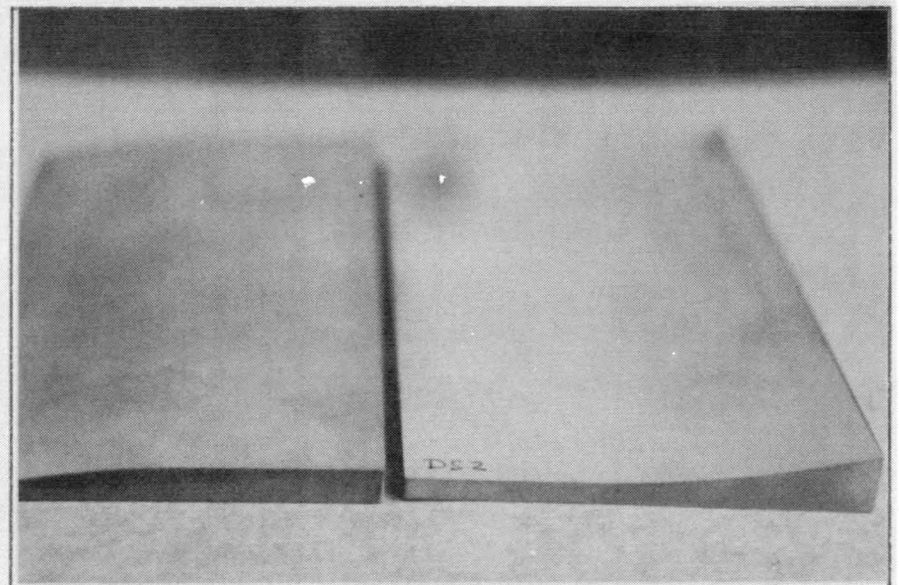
Samples DS2A&B after EDM wire cutting showing faying surfaces
